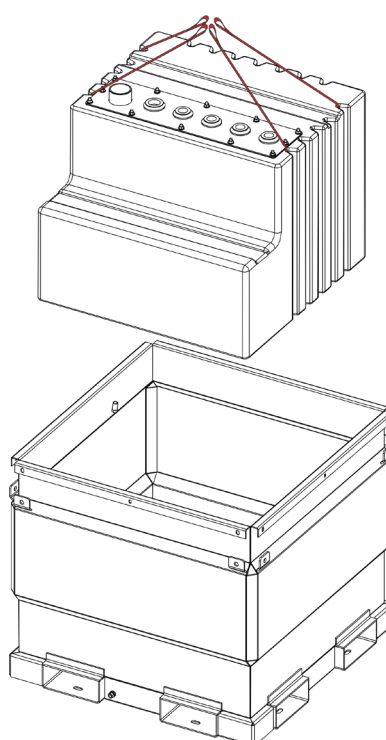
Step 7 (Inner Tank Removal DEF130 / 05DEF)
